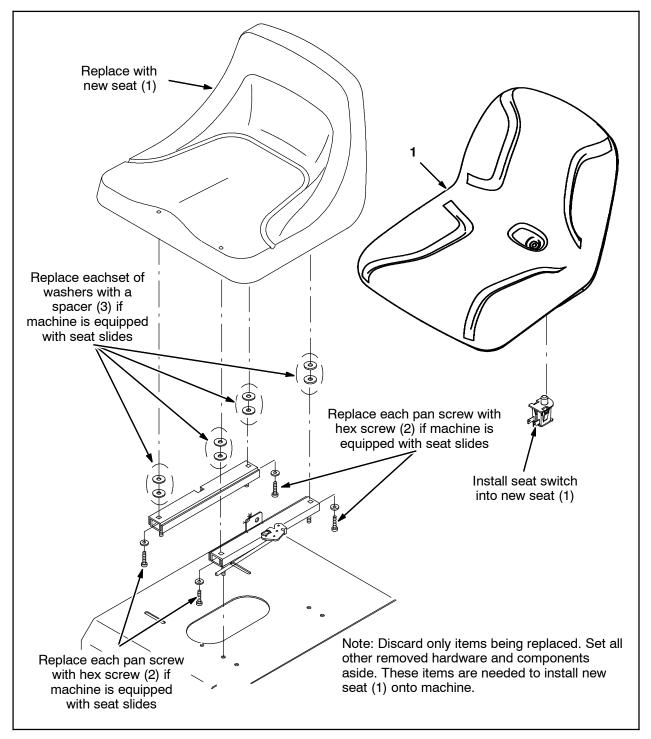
6100, 6200, 7100, 7300, S30, T7, T15, EZ Rider, and R14 machines
